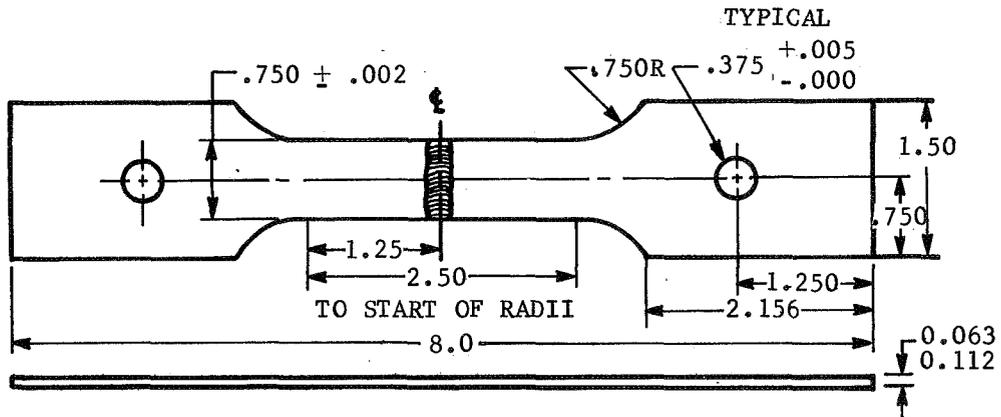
Reduced-section Welded Tensile Specimen
